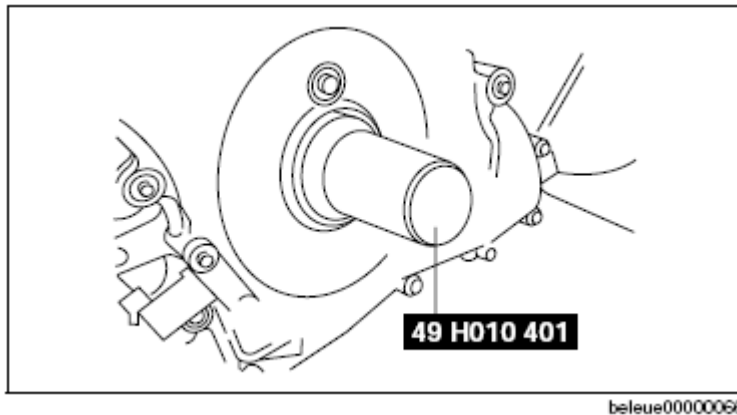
Compressing Oil Seal Using SST (49 H010 401)
